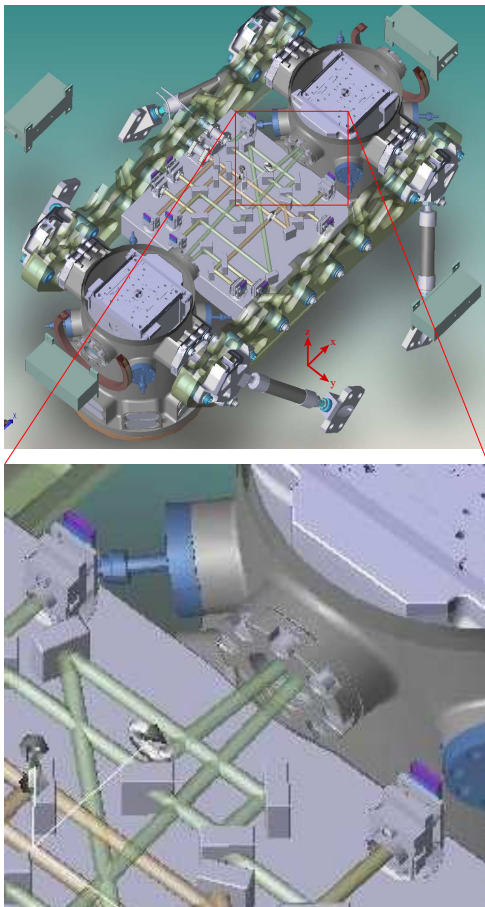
CAD drawing showing a sectional view of the LTP core assembly and a detailed view of one optical window situation. Drawings provided by EADS Astrium.
